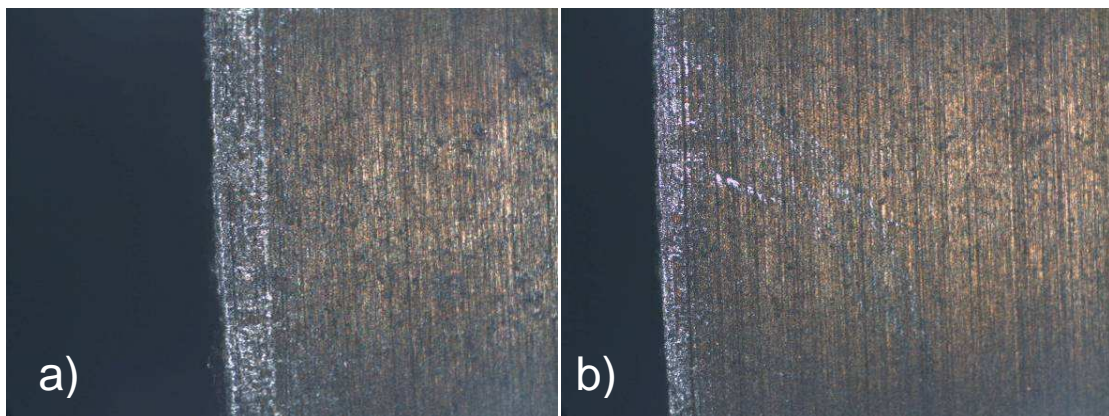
Flank wear after 2min of machining with air lubrication (x50).
